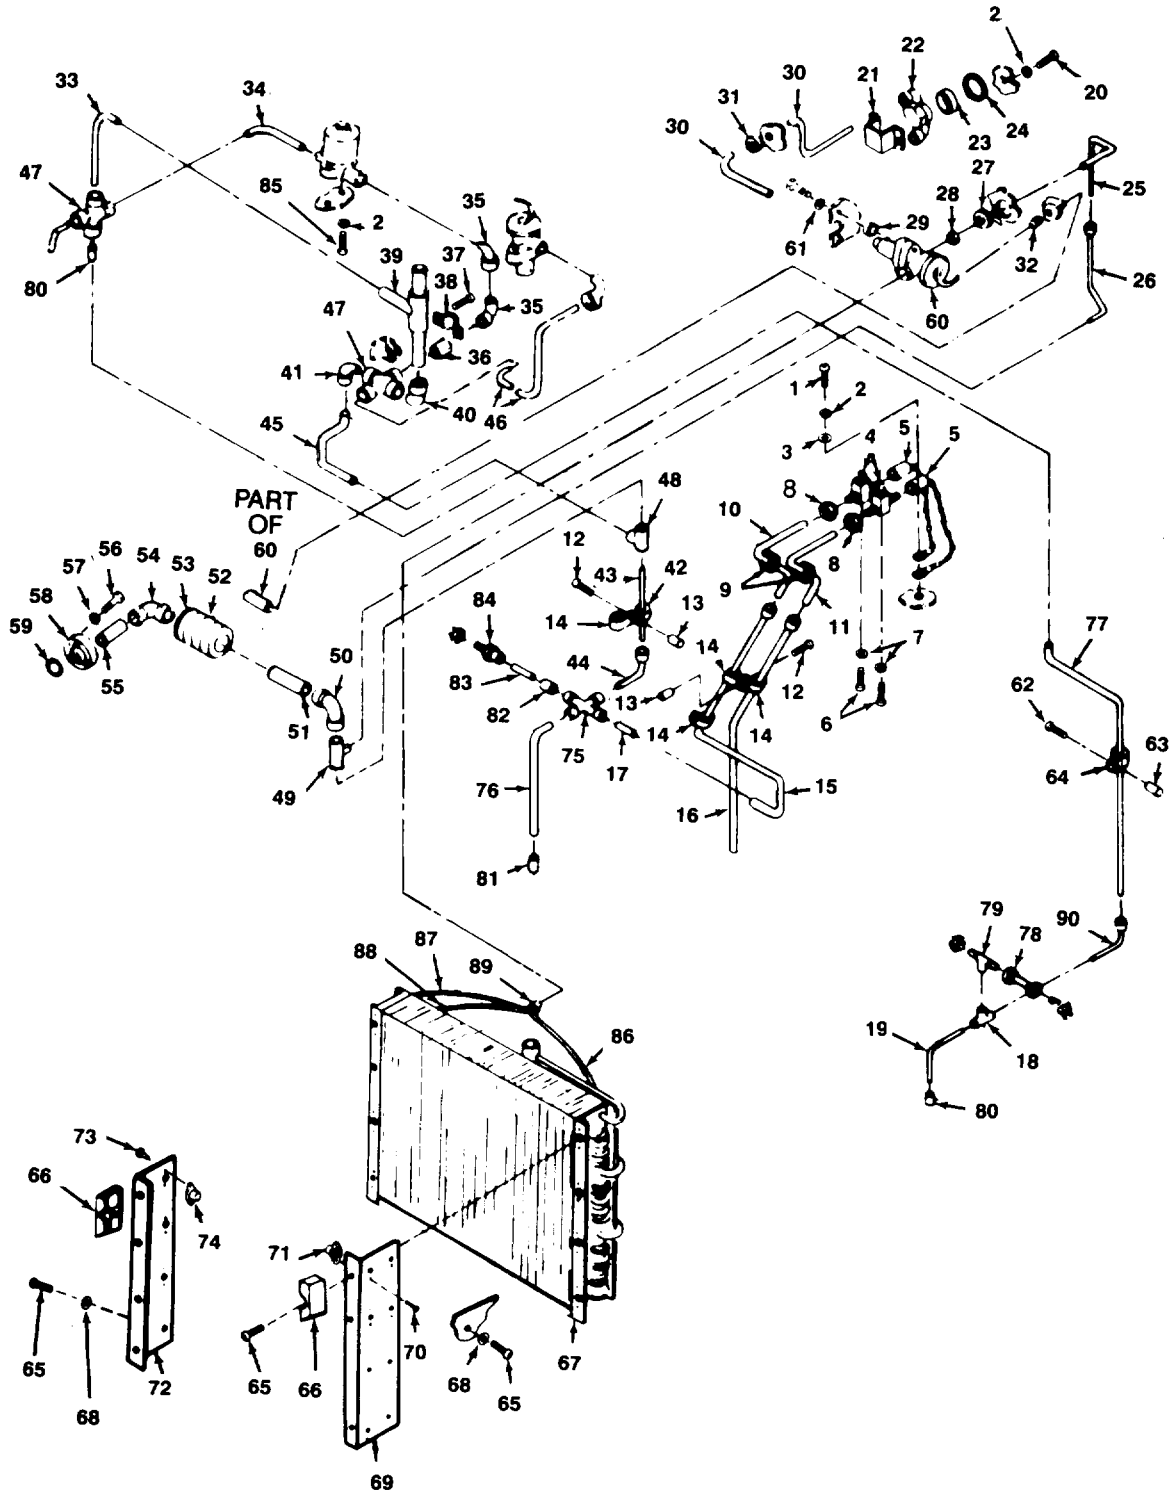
Evaporator Coil, Refrigerant Tubing, Fittings and Valves.
